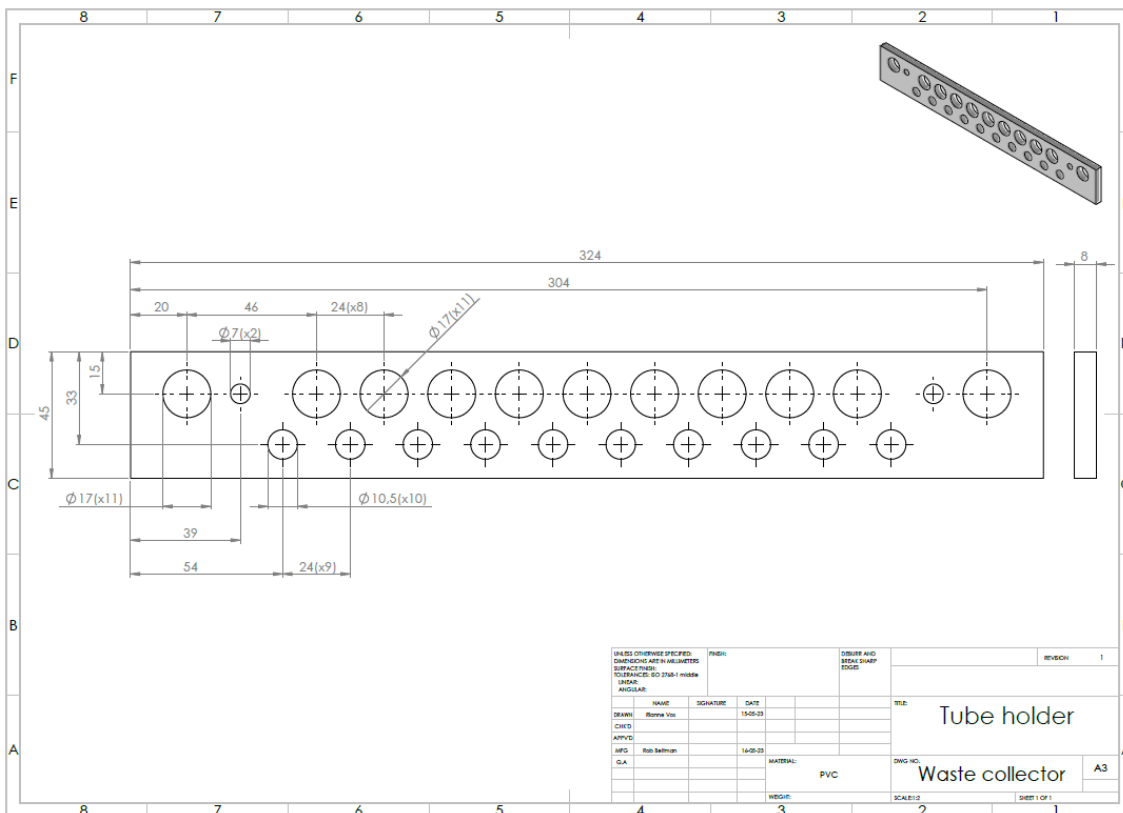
Drawing of waste tube plate created in SolidWorks with dimensions in millimeters (mm). The drawing serves as reference for the sawing, milling, and drilling production process.
